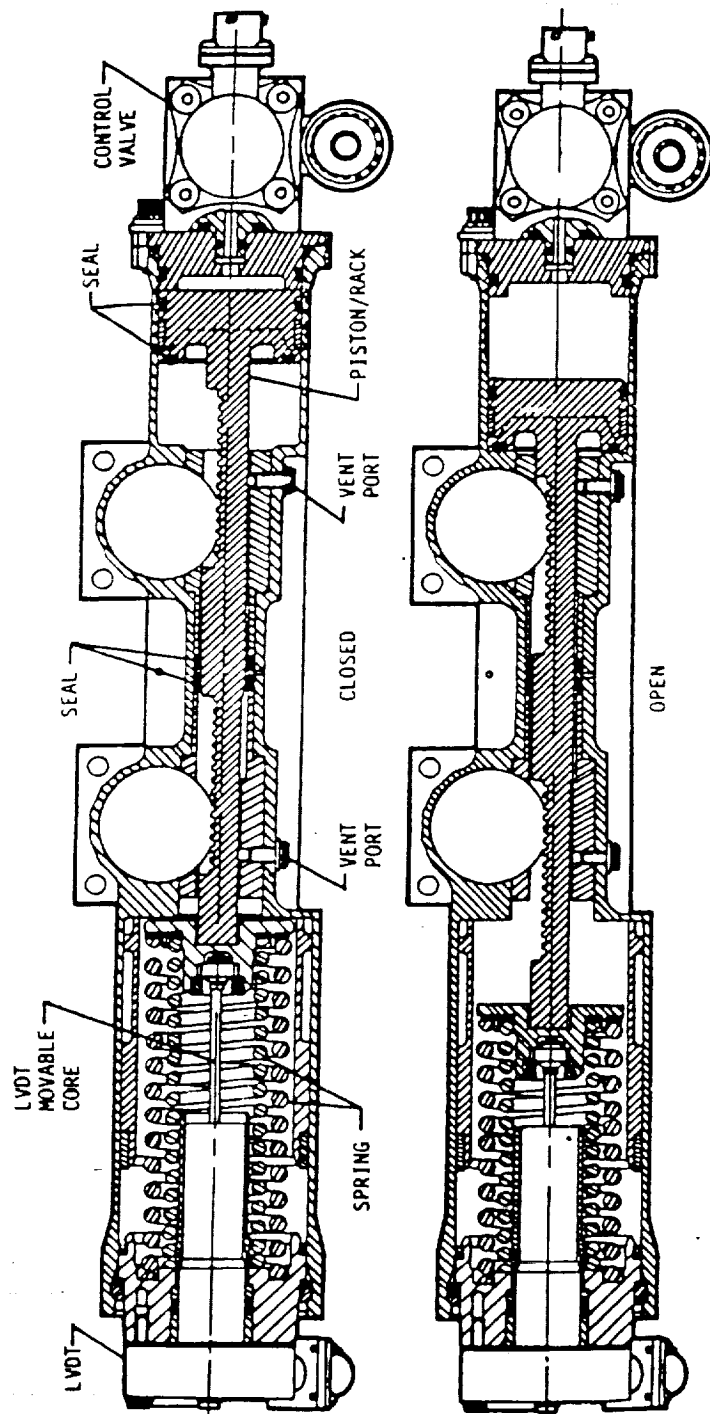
ACTUATOR ASSEMBLY CROSS SECTION
